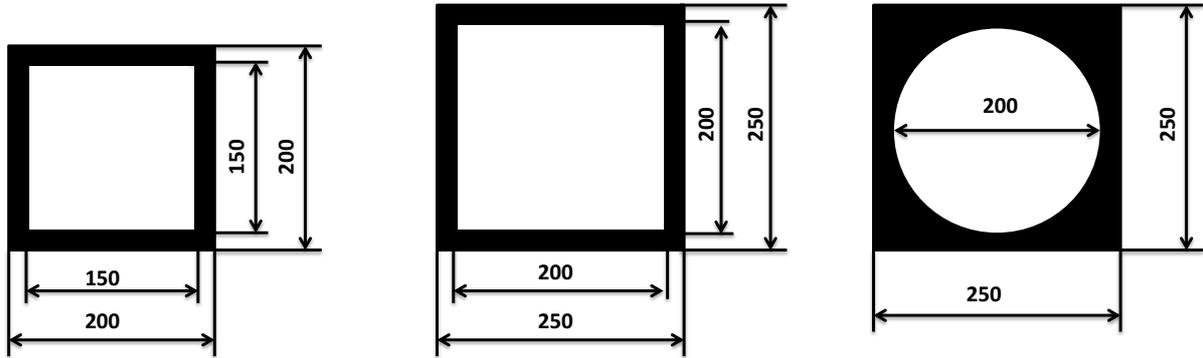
Dimensions (mm) of Frames Used in Drop Weight Tests
